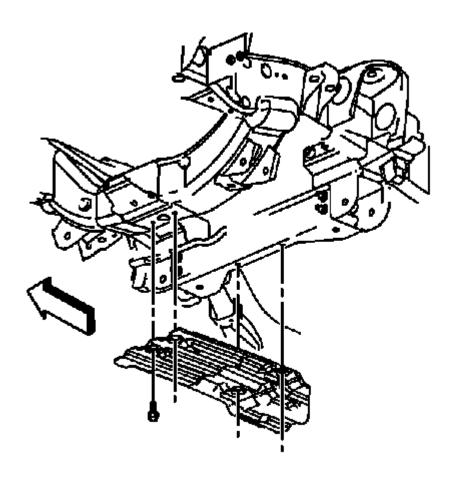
View Of Crossbar Bolts & Bar (2WD) Courtesy of GENERAL MOTORS CORP.
